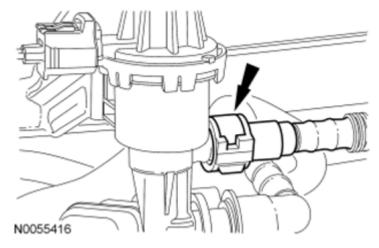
Locating Vacuum Hose Courtesy of FORD MOTOR CO.
